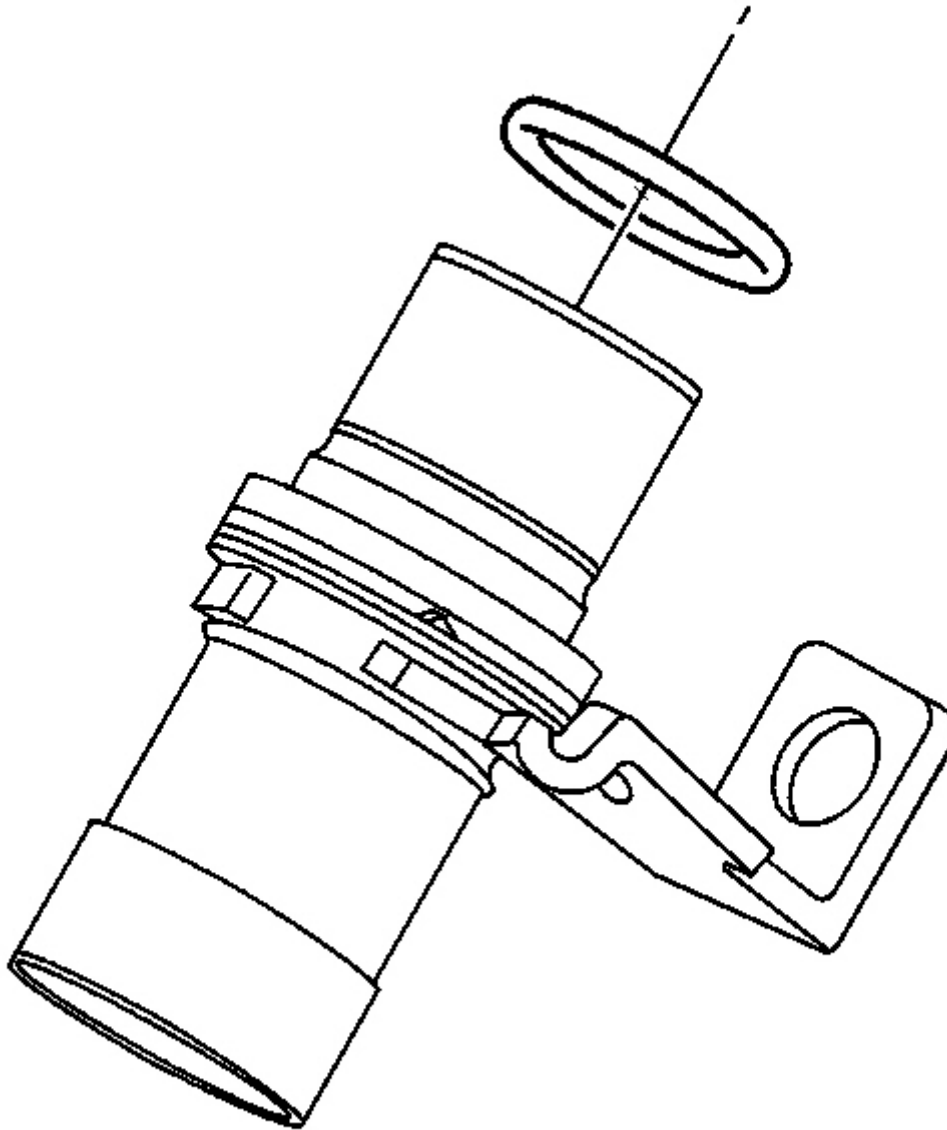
View Of Crankshaft Position Sensor Seal O-Ring
